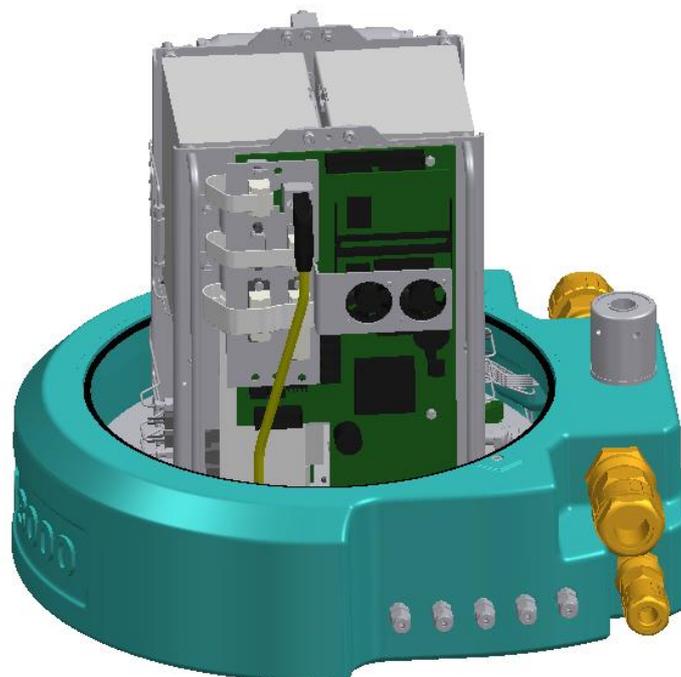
Processor board with ribbon flat cable and fans mounted in the EnCal 3000
